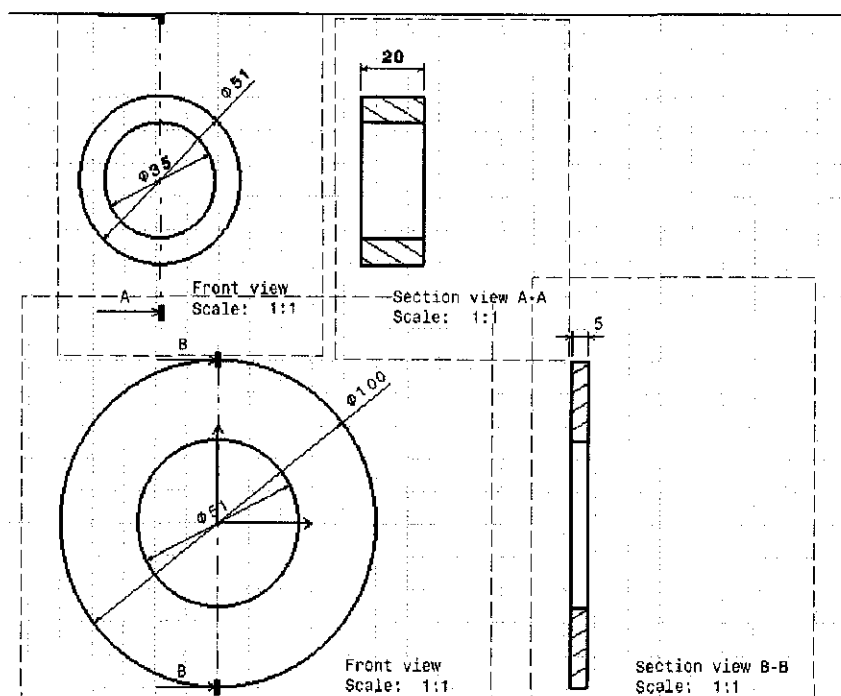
Drawings of Square O-Ring and Gasket
